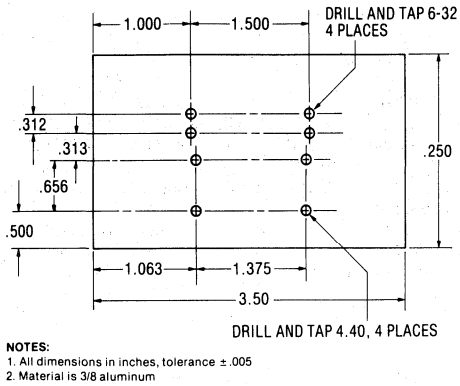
Heatsink Base Plate Construction for Hybrid Amplifier Test Fixture
